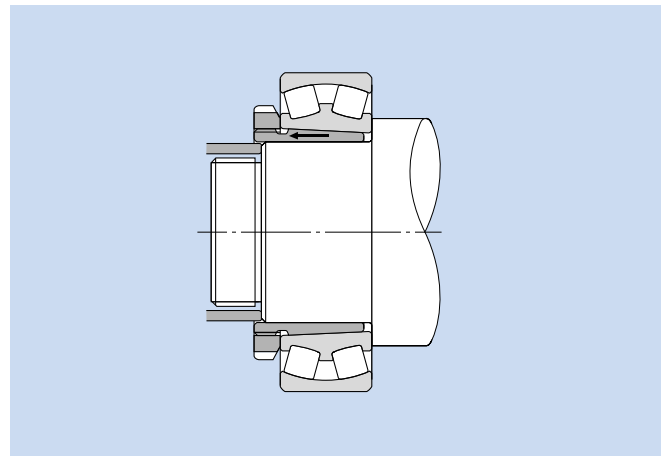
Disassembly of bearing with withdrawal sleeve
